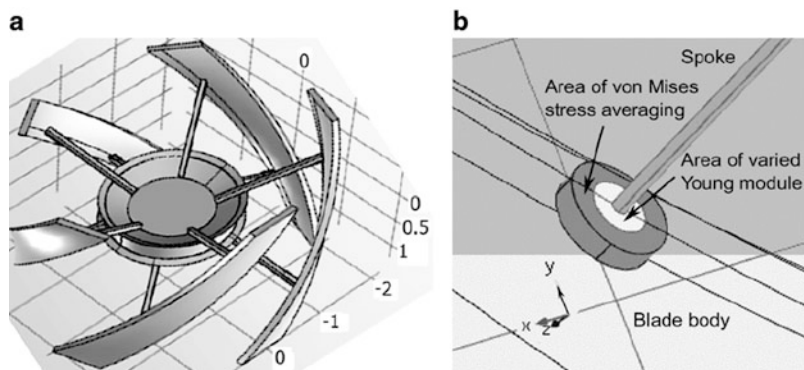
CAD model of the studied wind turbine rotor (a) and mounting of spoke to the blade (b)
